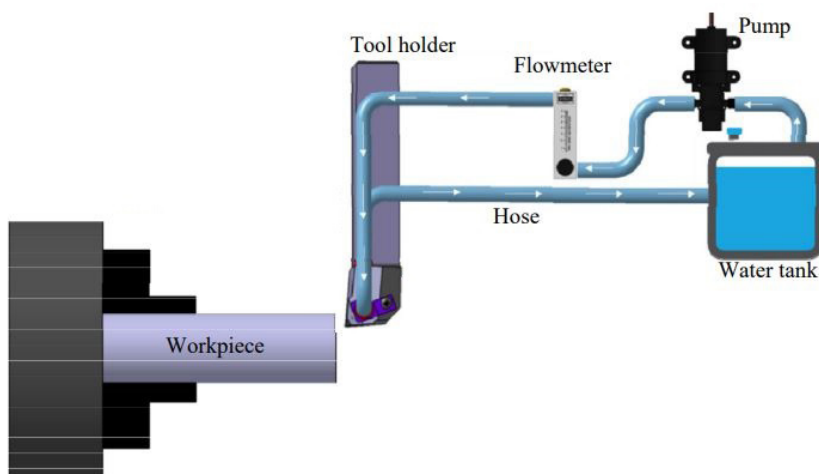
Schematic view of the closed loop internally cooled cutting tool for turning [44].
